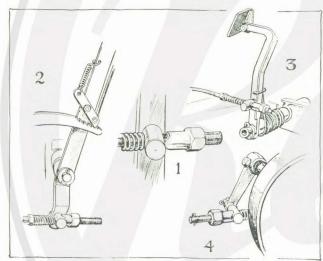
THE BRAKE ADJUSTMENTS OF THE 11 H.P. "STANDARD."
